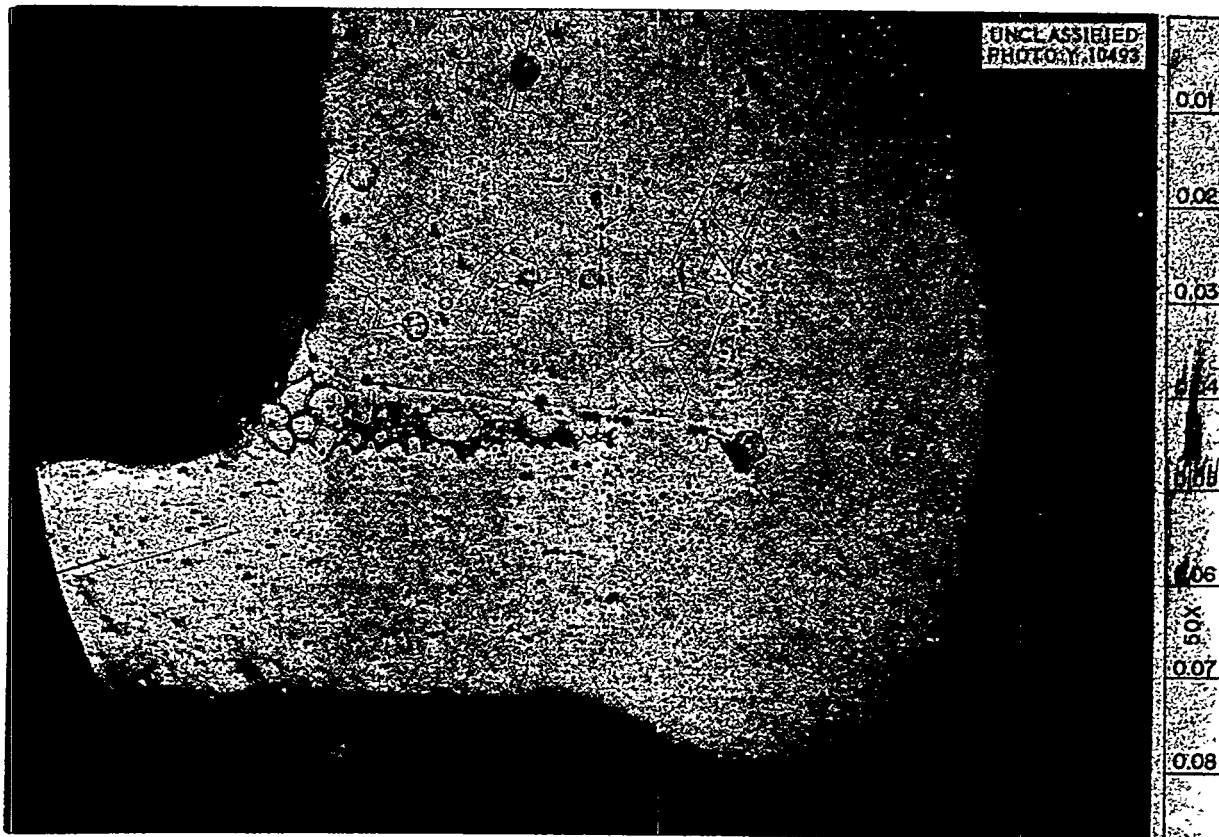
Inconel Tube-to-Header Heliarc Welded Joint Backed Up with G-E No. 62 Brazing Alloy. Etchant: glyceric regia. 50X
